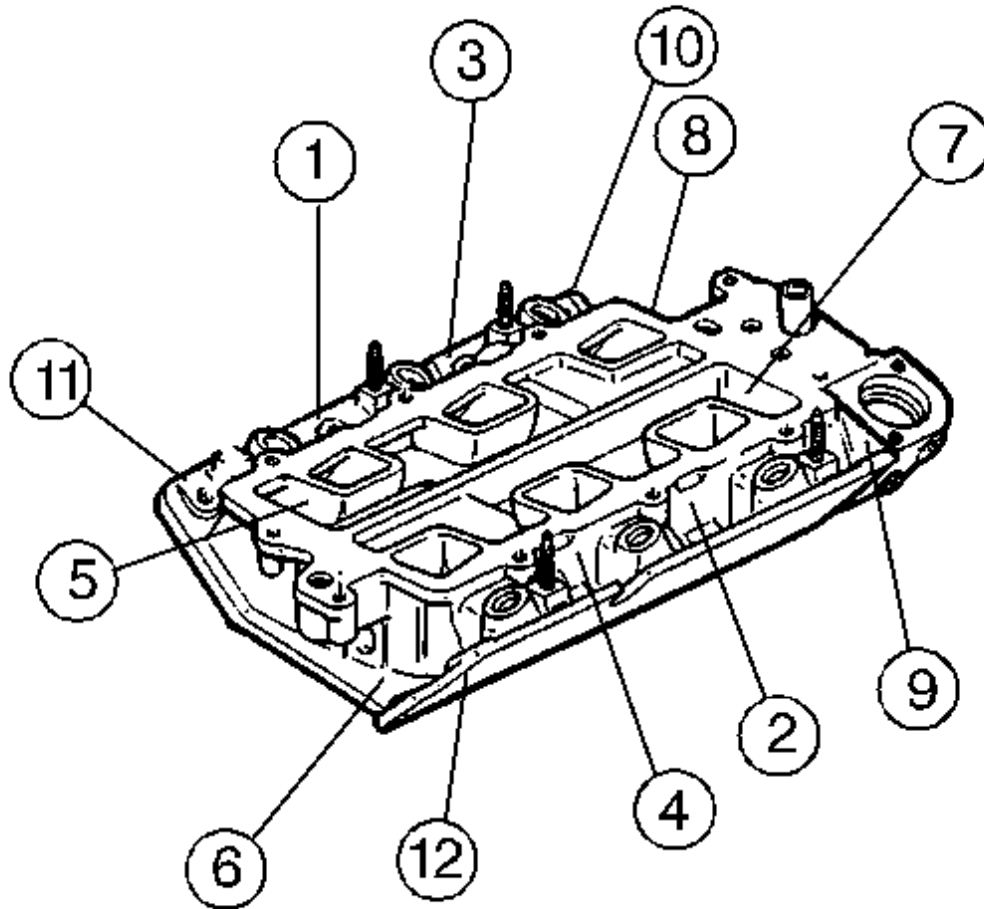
Lower Intake Manifold Bolt Tightening Sequence
